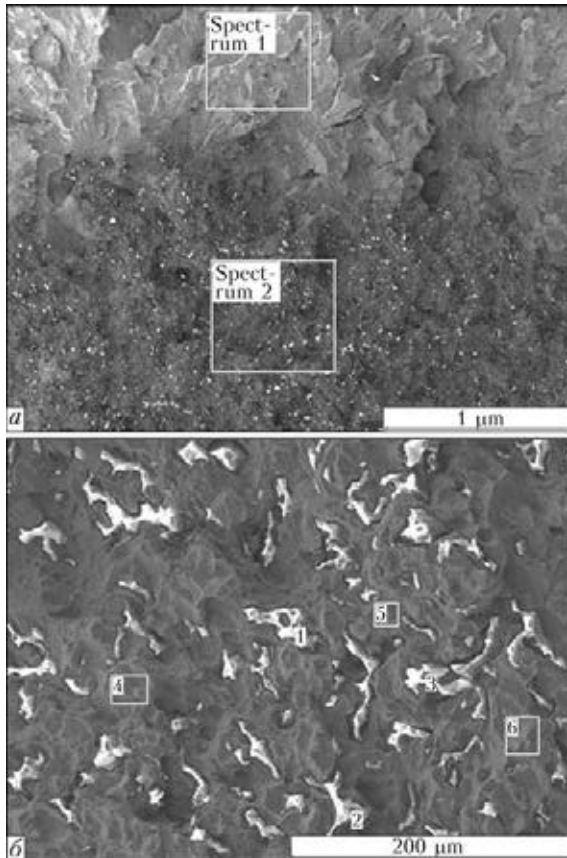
Dead spots in the fracture surface of rail welded joint
